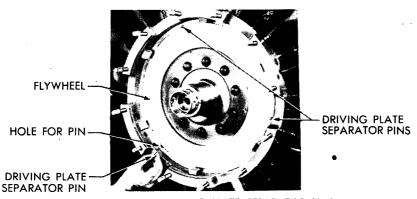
Installing Rear Cone, Fan, and Flywheel Assembly 240
